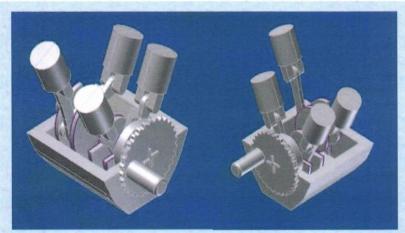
Final engine assembly from left hand view (on left) and right hand view to show detail. The engine block cover has been removed to reveal inside.
